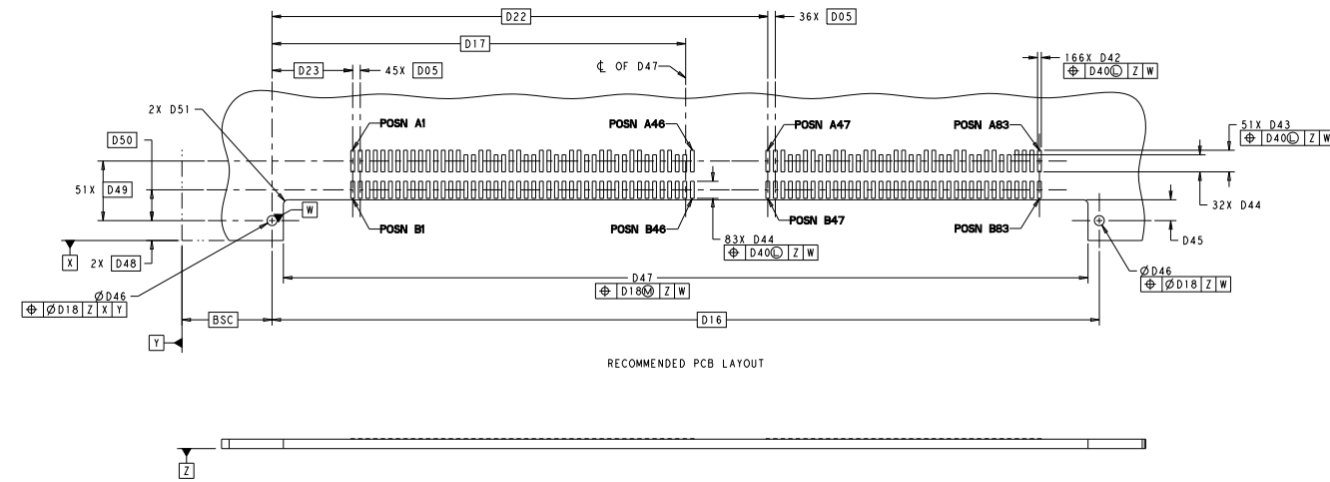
FREE (PLUG) X16 CONNECTOR BOARD LAYOUT
